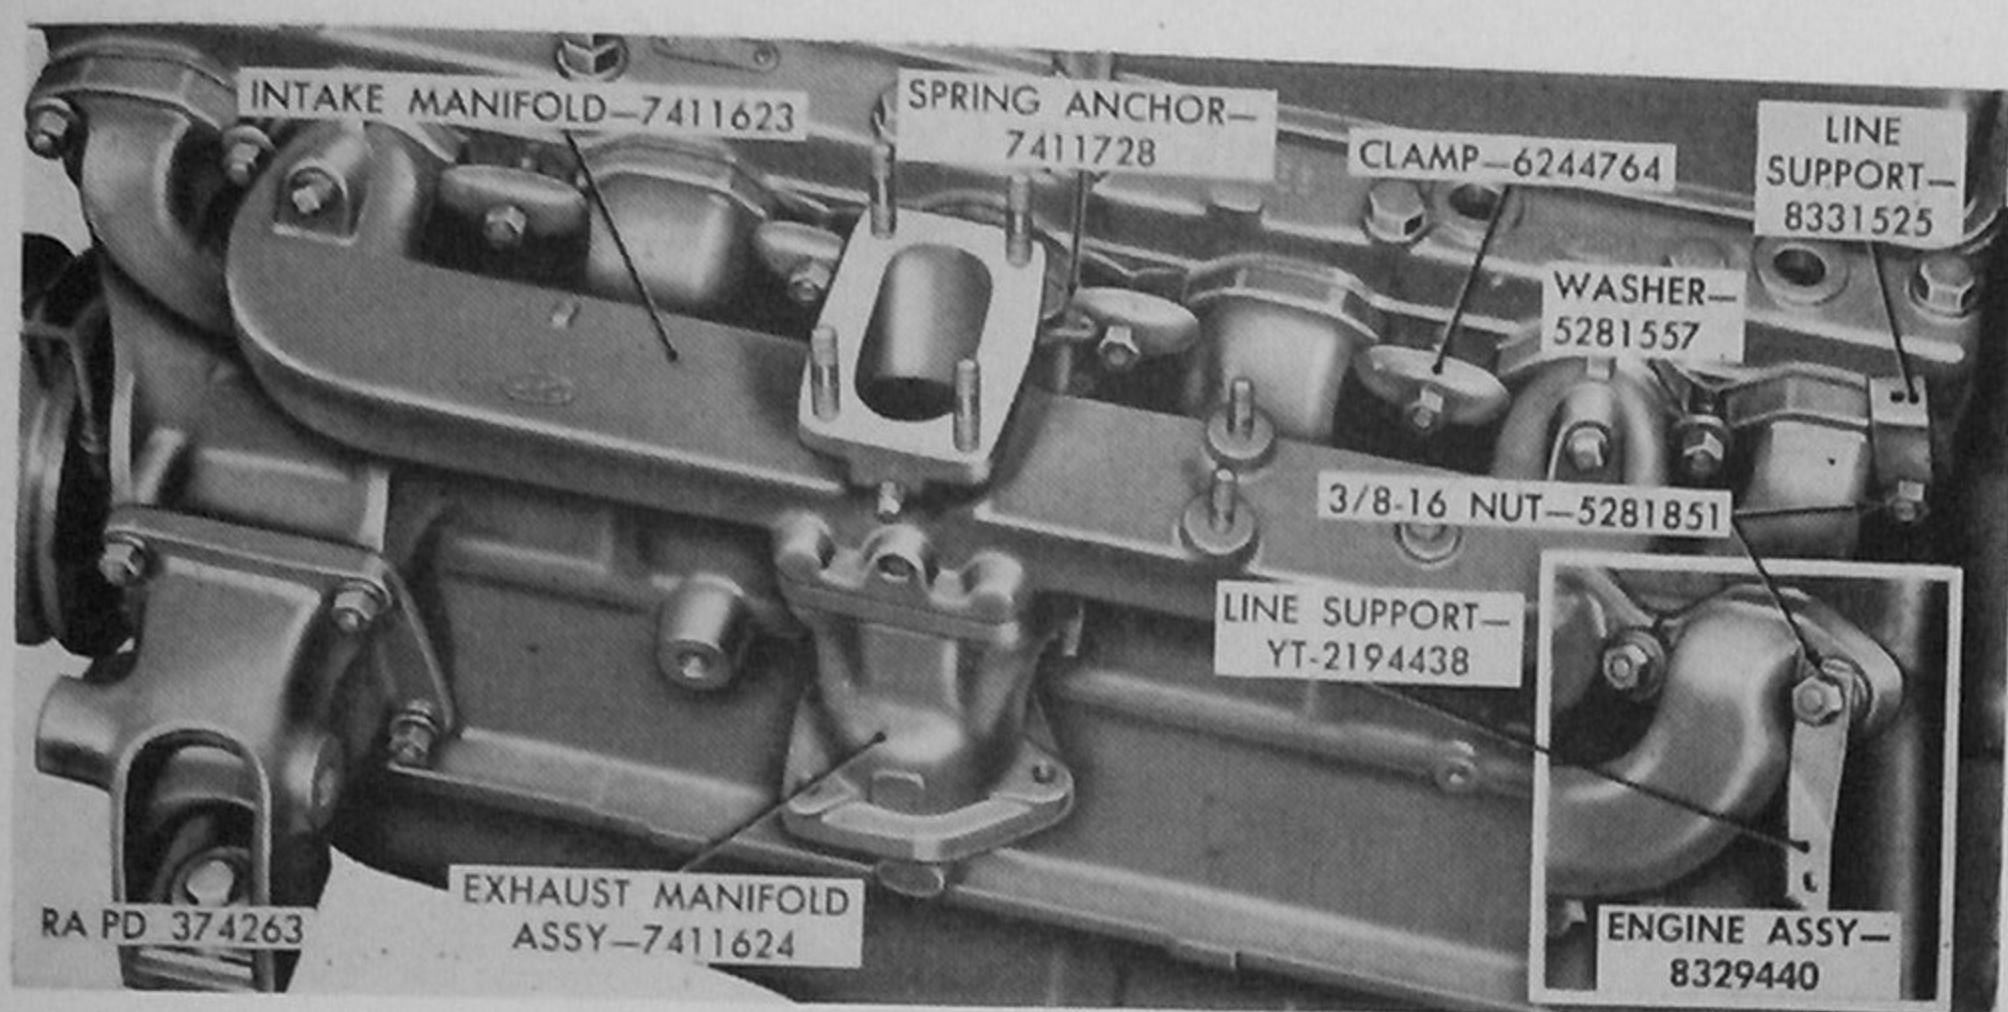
Intake and exhaust manifolds installed—engine assemblies 7411599 and 8329440.
